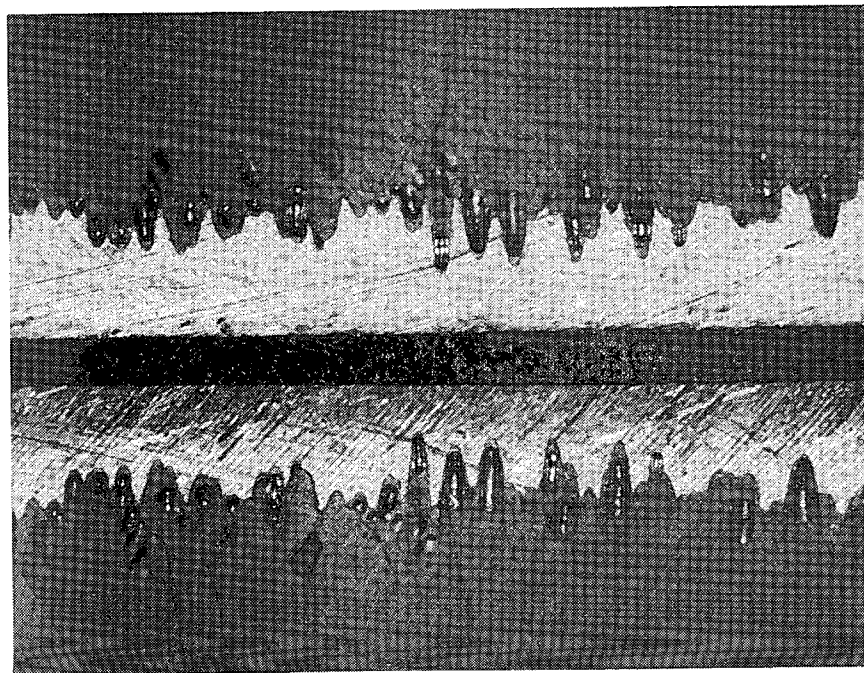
Fractured surface of weld made by use of straight beam of electrons showing weld spikes and cold shuts (11.5 X).
